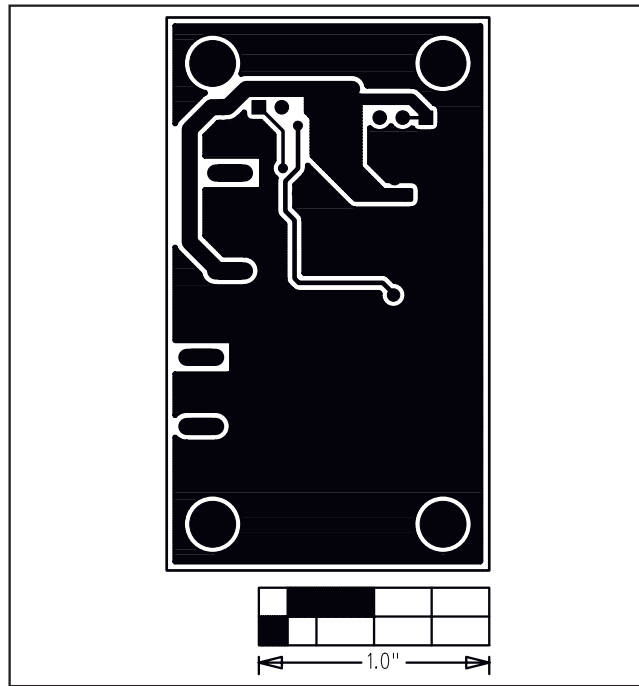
MAX8727 EV Kit PC Board Layout—Solder Side
